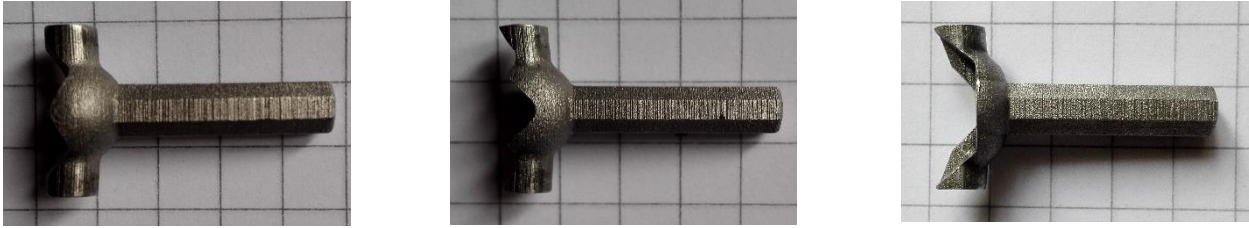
Overview of the joints indicating the bended pins at the top and bottom of the joints.
